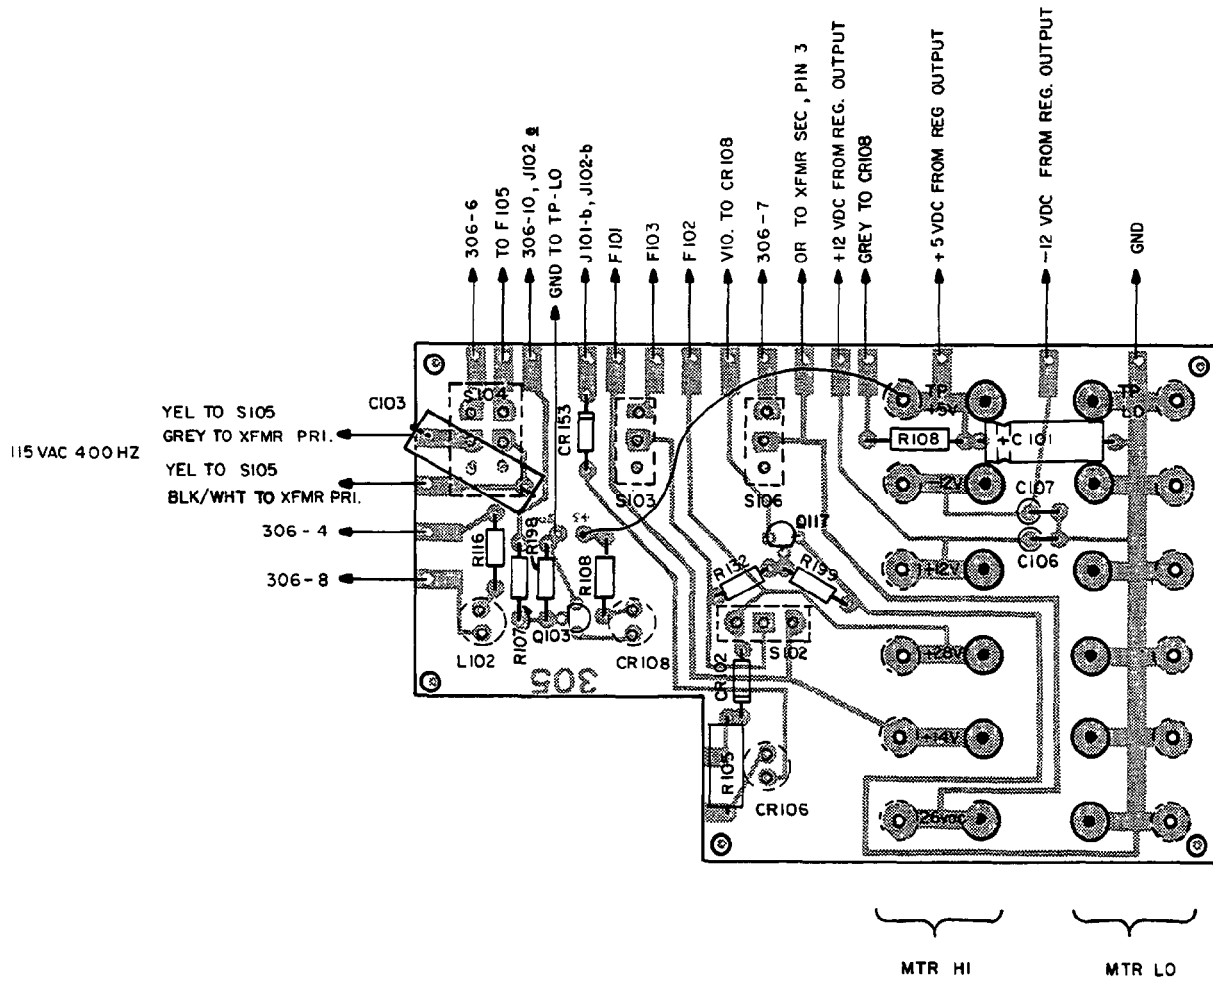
P.C. BOARD ASSEMBLY, BOARD 305, DRAWING
